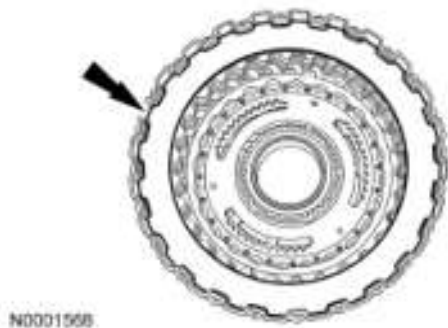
Locating Forward Clutch Steel And Friction Plates
